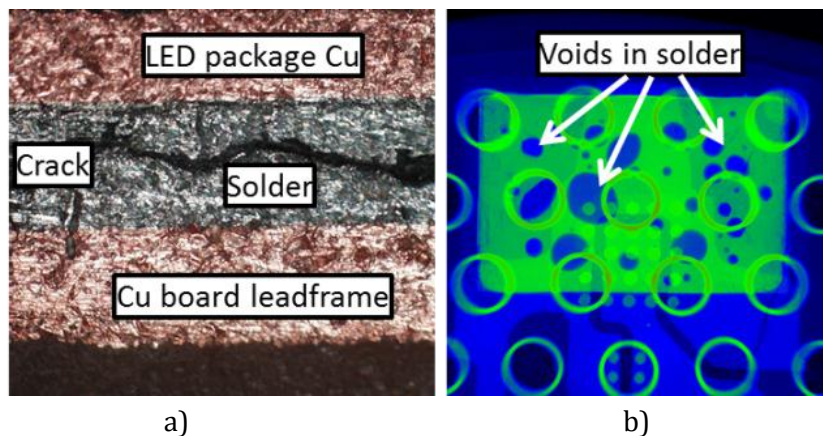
a) Optical micrograph showing the crack in the solder joint. b) X-ray photograph of thermal pad showing voids in solder [1]
